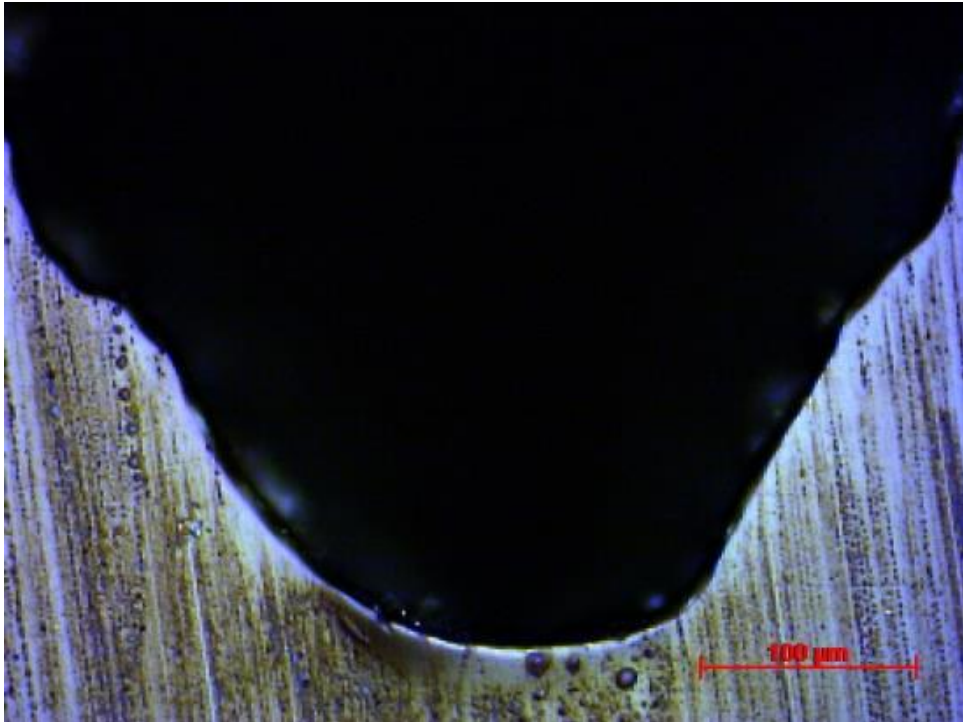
Microscopic image of a slot created by a cutting tool (F3 specimen)
